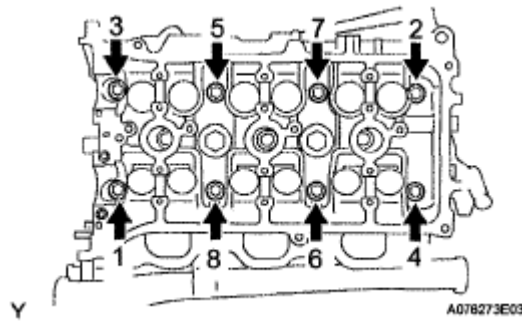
Identifying Bearing Cap Bolts Loosen Sequence (Bank 1 2WD)
